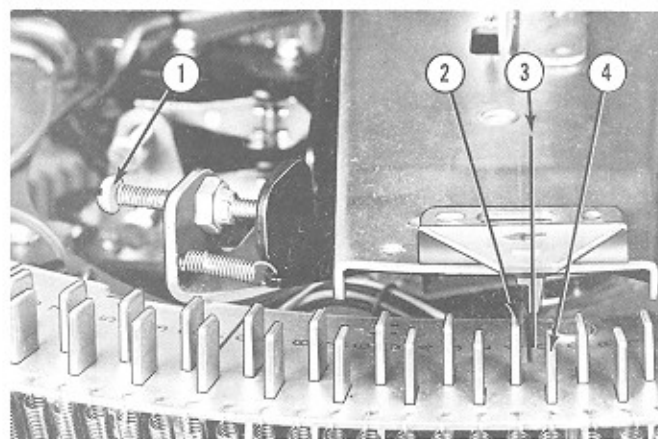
KICK-OFF SCREW ADJUSTMENT
